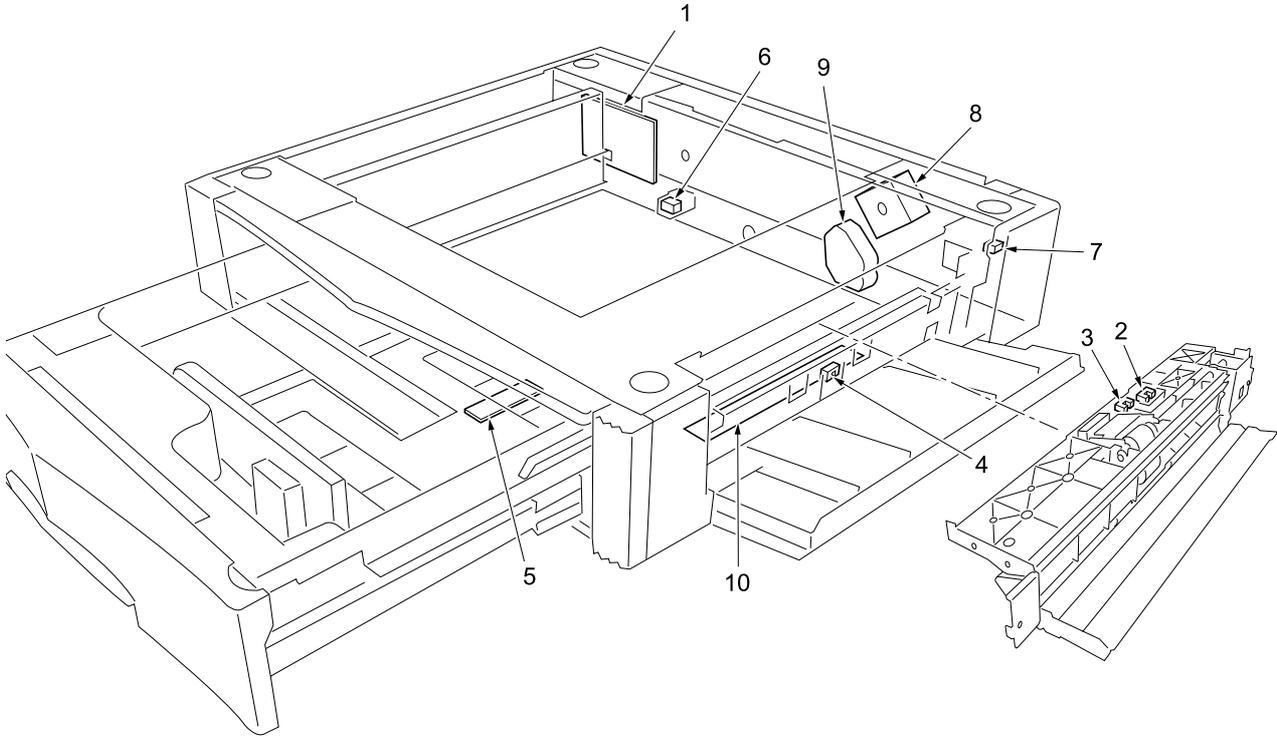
Paper feeder inside, rear side and primary paper feed unit
